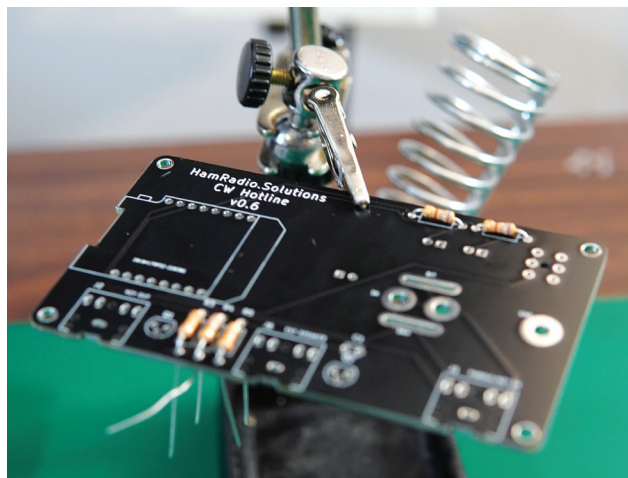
Using a vice may be beneficial while assembling this kit. Here is an alligator clip holding up the PCB. The alligator clip has rigid edges that, if placed on a trace, may cause damage.
